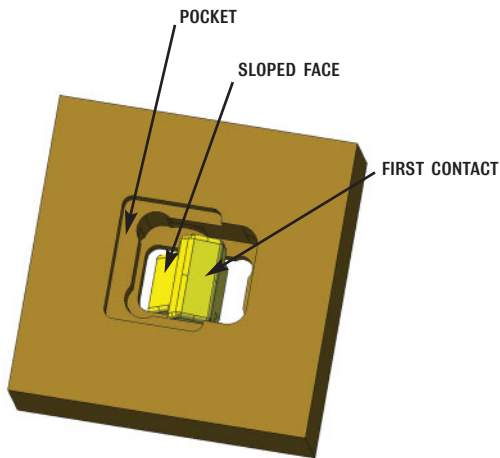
THE FIRST CONTACT PROPERLY SITS IN THE INSERT OR HOUSING.
